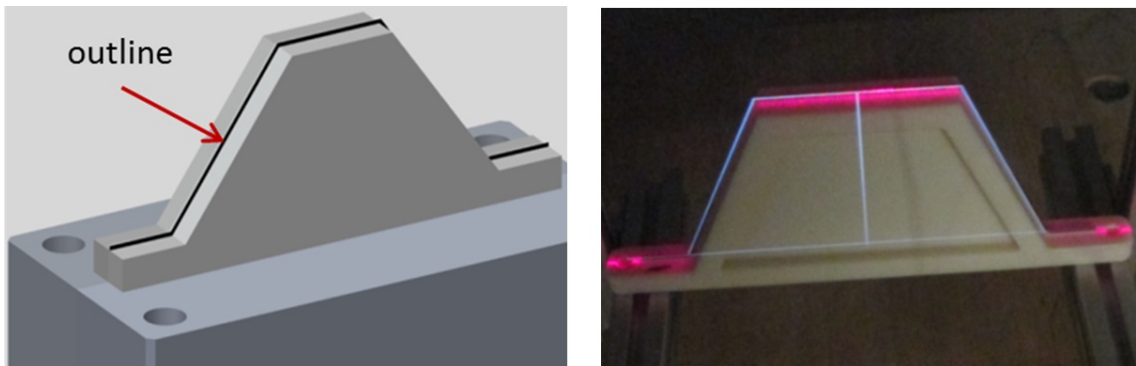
Laser plane alignment: A) Trapezoid-shaped tool with outline shown. B) Alignment of reflected 2D sketch, tool outline and laser line confirming correct alignment of laser plane with virtual plane.
